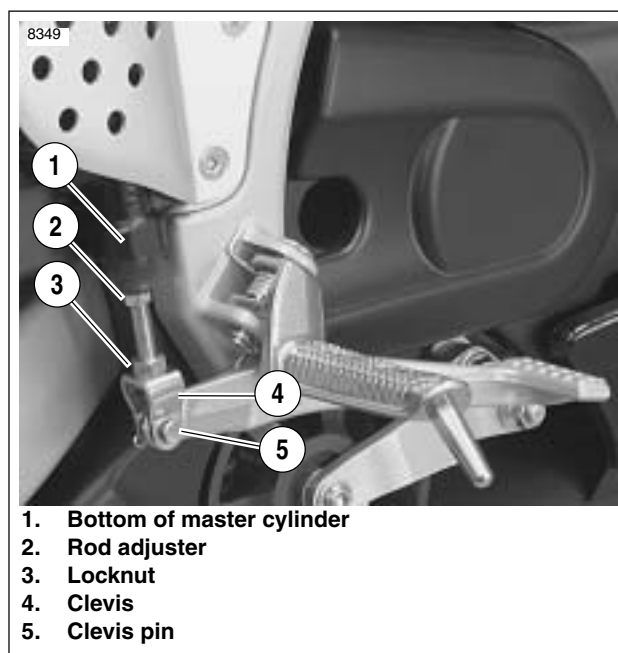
Rear Brake Pedal Pushrod Adjustment
